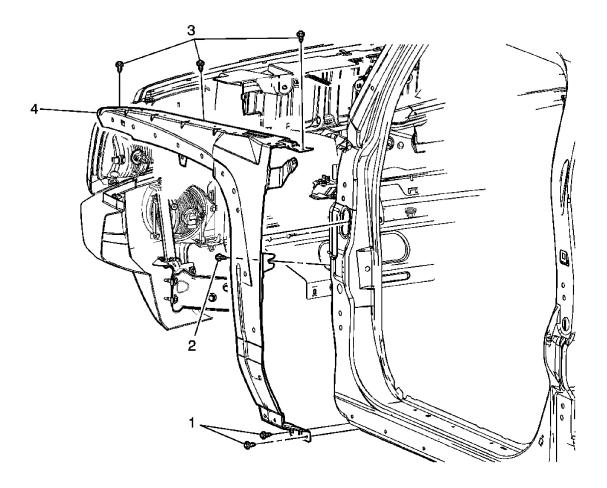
Replacing Front Fender Courtesy of GENERAL MOTORS CORP.
